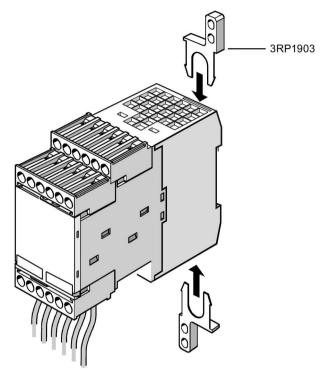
Mounting the DM-F with push-in lugs for screw mounting
